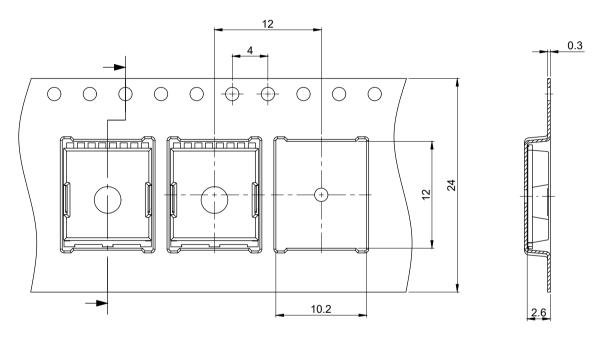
Packaging variant PG-HSOF-8, dimensions in mm
